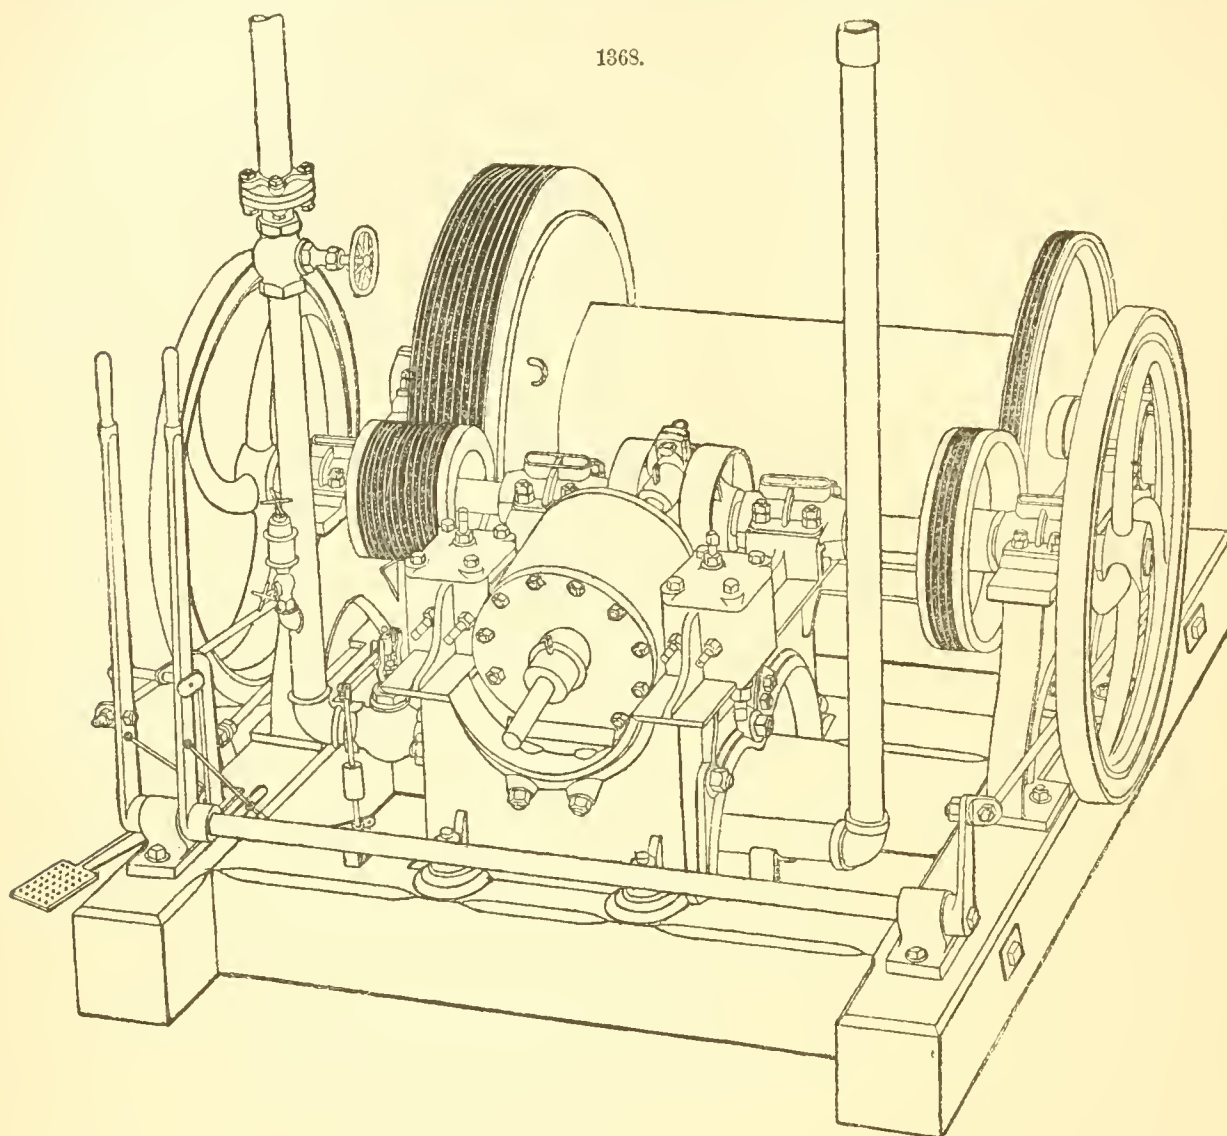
represents a differential hoisting engine manufactured by W. D. Andrews of New York. The hoisting drum has a grooved friction-wheel at each end, one wheel being 30 inches and the other 26 inches in diameter. The pinions upon the engine-shaft engaging with these wheels are respectively 4 and 8 inches in diameter. By means of levers which communicate with eccentrics, one of which is shown in Fig. 1369, either wheel may be brought into or moved out of contact with its pinion. When the large wheel is in contact, the drum has 1 revolution to 7½ revolutions of the engine; with the small wheel engaged, the revolutions are as 1 to 3¼. When a heavy weight is to be raised, the large wheel is used, and a slow motion is imparted to it; for a light weight, the small wheel is used, and the speed is doubled, the engine running at a uniform rate. A brake-lever operated by the foot is used to cause a brake to bear upon the face of the drum-wheels, and by this means the load can be lowered or held at any desired point. The same may be done by graduating the pressure upon the hand-levers. It is claimed that in these machines the power required is less than when using eogs; and the unpleasant noise of eogs, as well as danger from their breaking by overstraining or accident, is entirely avoided. No concussion or jar results from throwing the drum into or out of gear, either when loaded or light. The following table is based on 50 lbs. steam-pressure:
